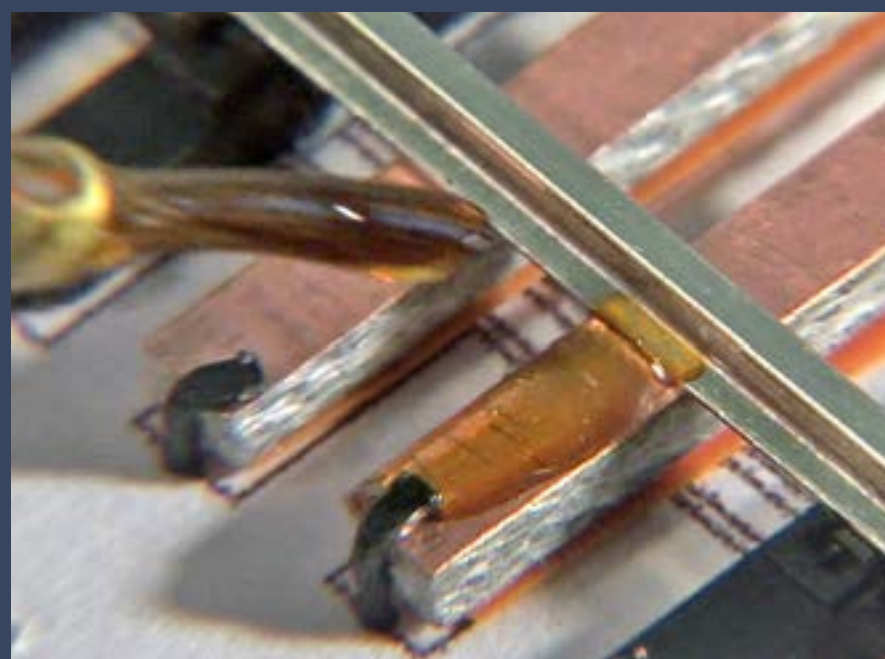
I apply a rosin solder flux to the PC tie and rail base. Applying a hot solder-loaded iron into this flux allows for very fast-flowing application of the solder.
